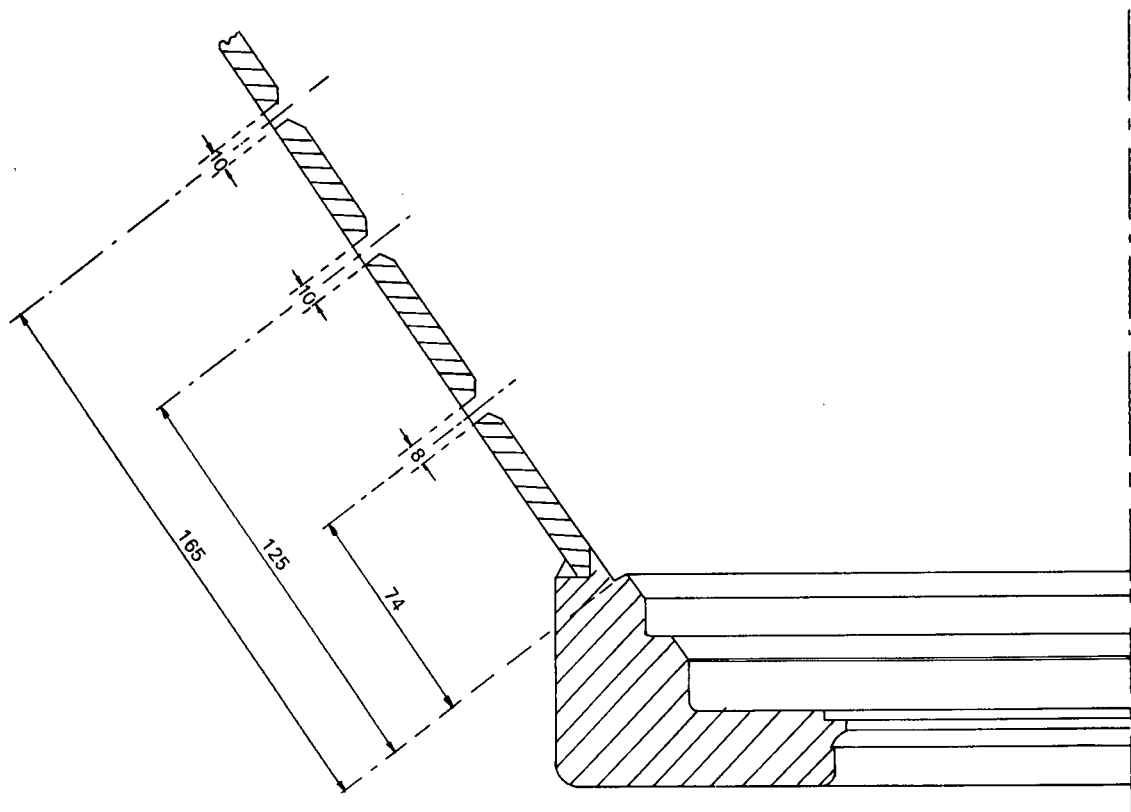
Details of basket holes in the modified K850. Dimensions in millimetres; not to scale.
